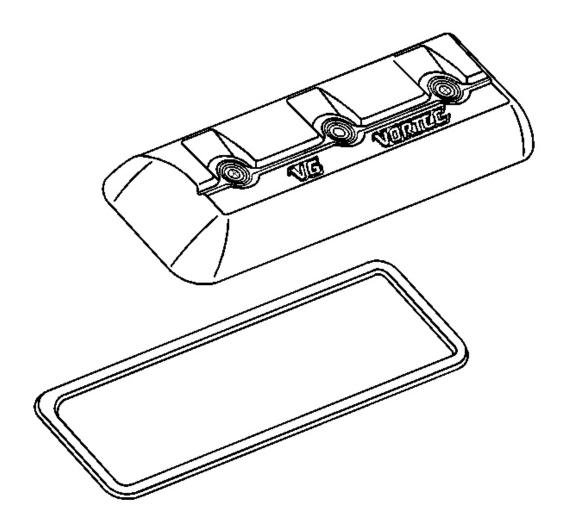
View Of Rocker Arm Cover And Gasket Courtesy of GENERAL MOTORS CORP.
